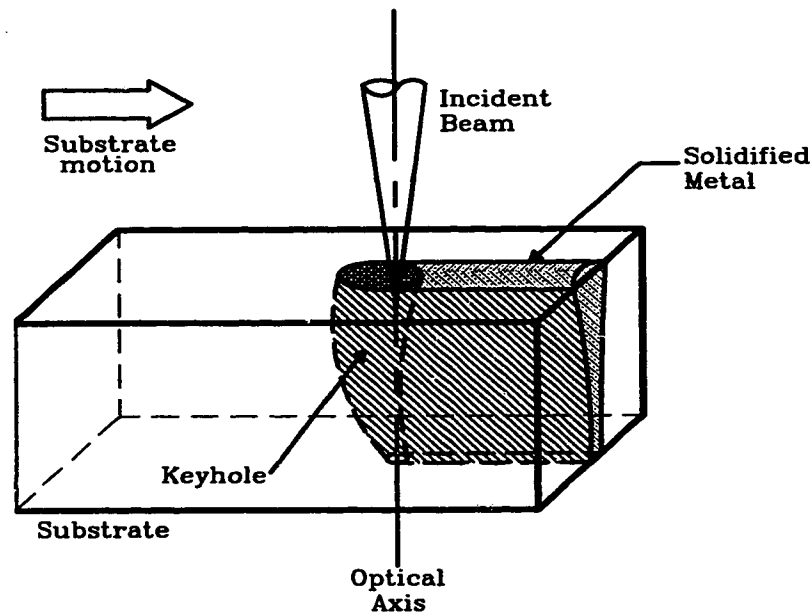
Schematic representation of the keyhole welding process.
